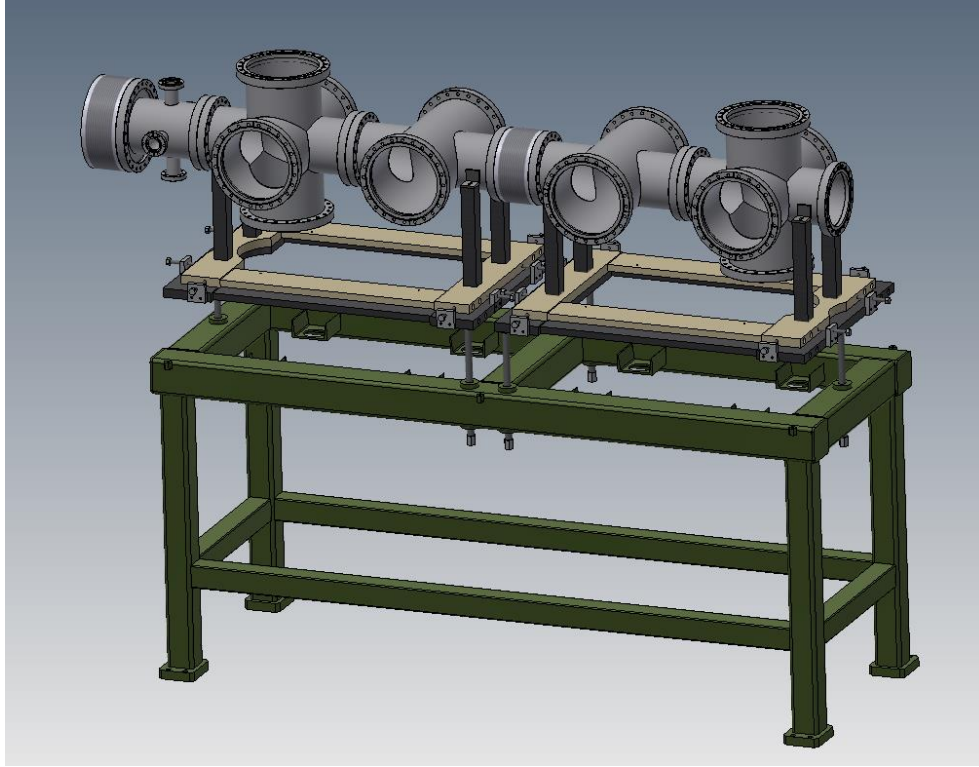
Longer steel stand supporting mirrored chamber and planar adjustable plate setup with adapter facing upstream. Adjustable bellows connects the 4-port chambers.
